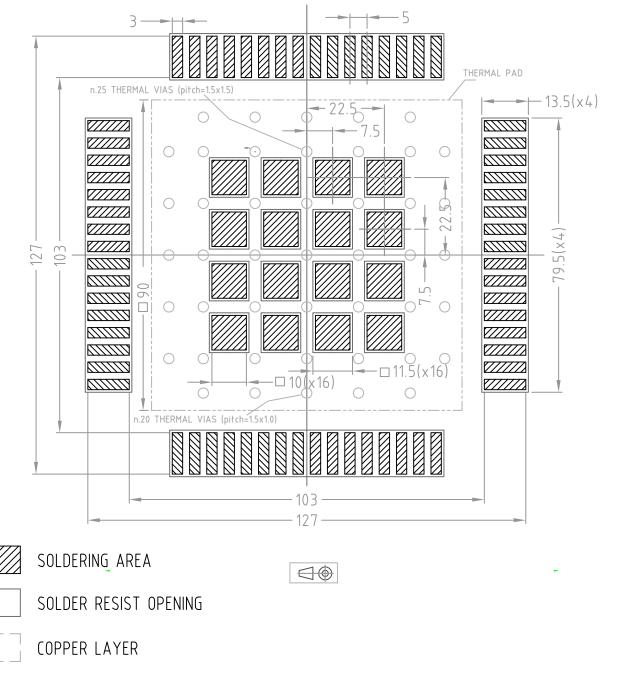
TQFP64 (10X10X1.0 mm, 6.0x6.0 mm exp. pad down) PCB footprint
